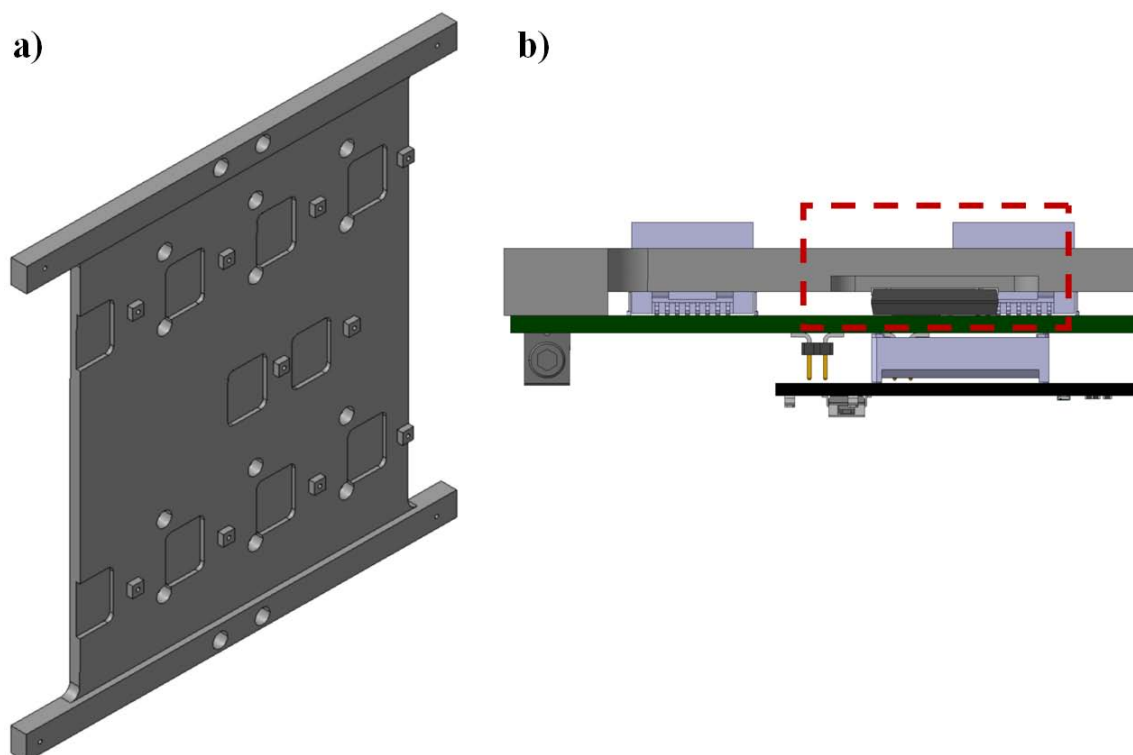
a) LVR heat sink; b) Pocket for an electronic chip inside the heat sink [7]
